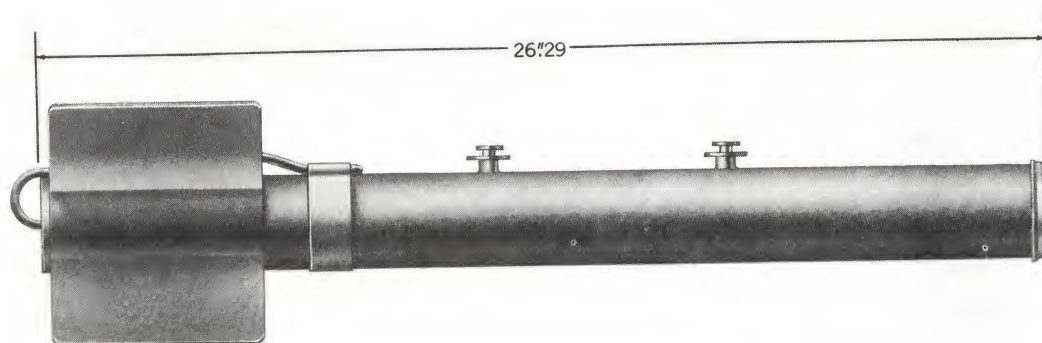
2.25-Inch Rocket Motor Mk 15 Mod 2, External View.
